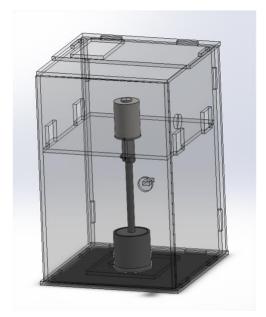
A 3D visualisation and a render of the assembly with the bob and cup mechanism.
